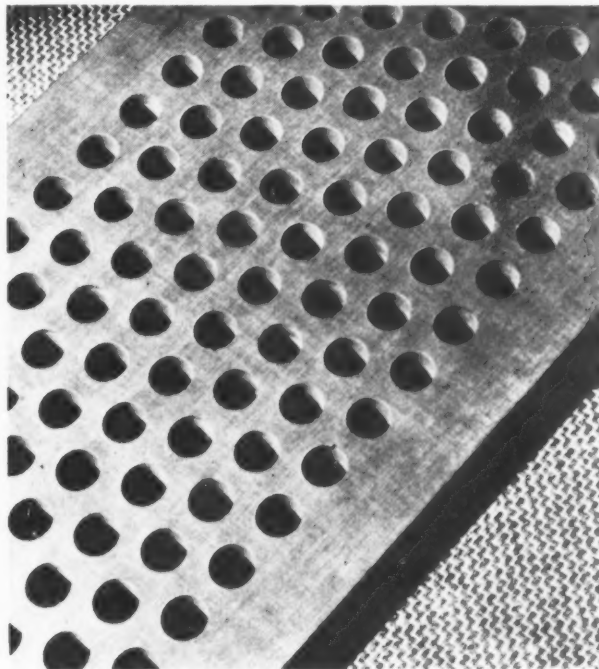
Close-up View of Suction Box Cover being Drilled in Fig. 1, Showing Excellent Finish Obtained
